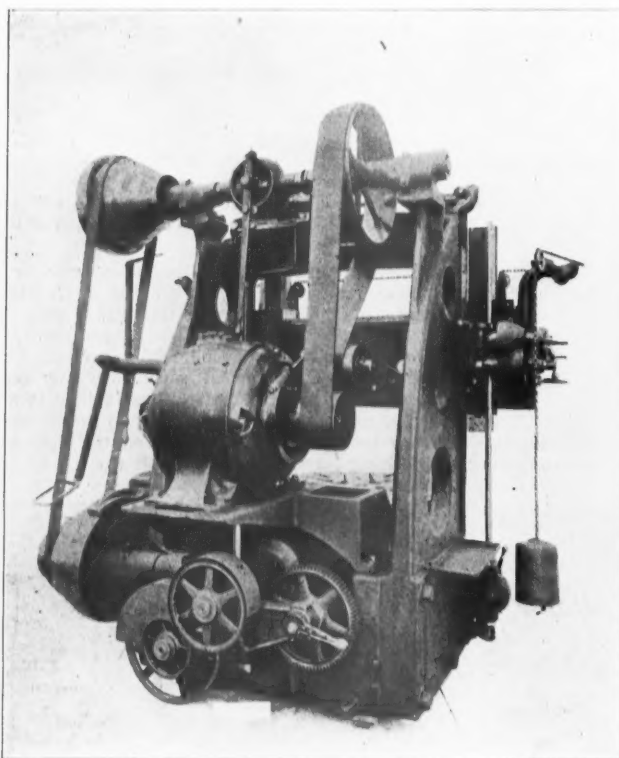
Boring Mill Belt Driven From Constant Speed Motor.
